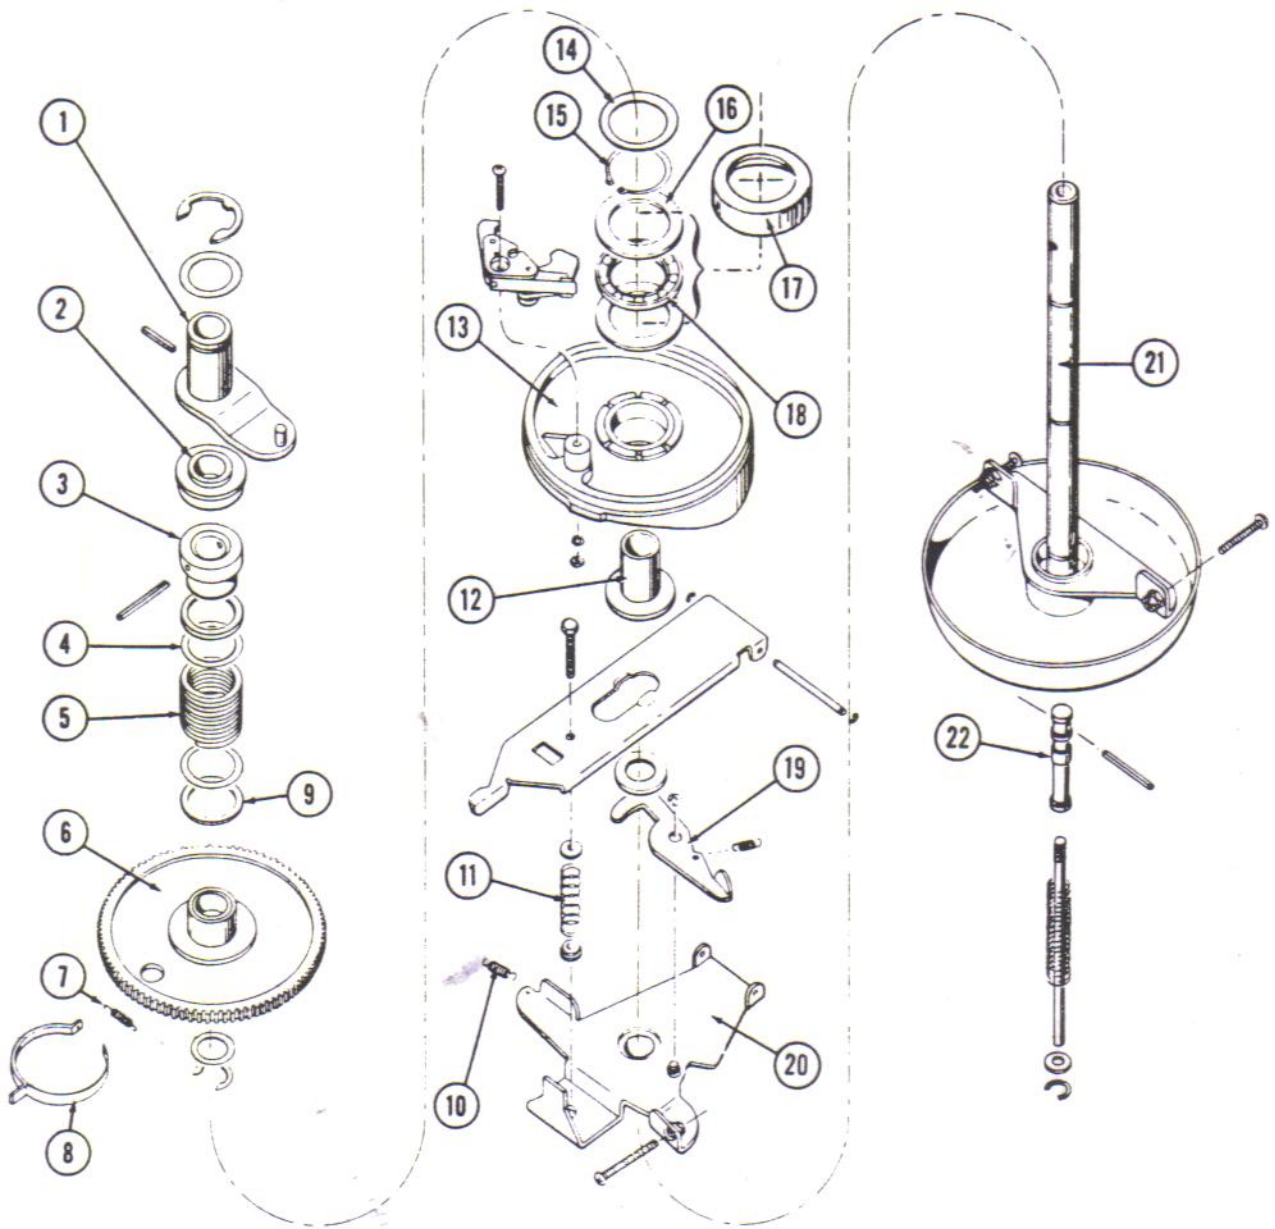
SELECTOR SHAFT ASSEMBLY AND MAIN CAM AND BUSHING ASSEMBLY, 2504
